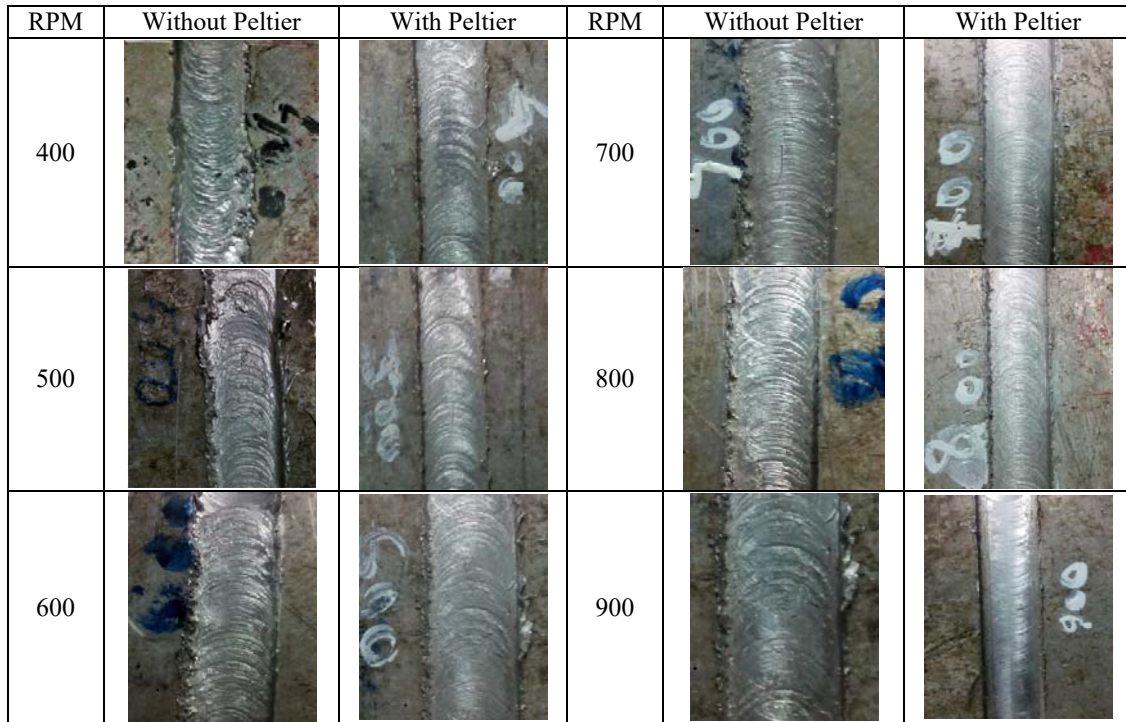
Surface images after machining with and without peltier chip at 3.0 mm depth of cut
